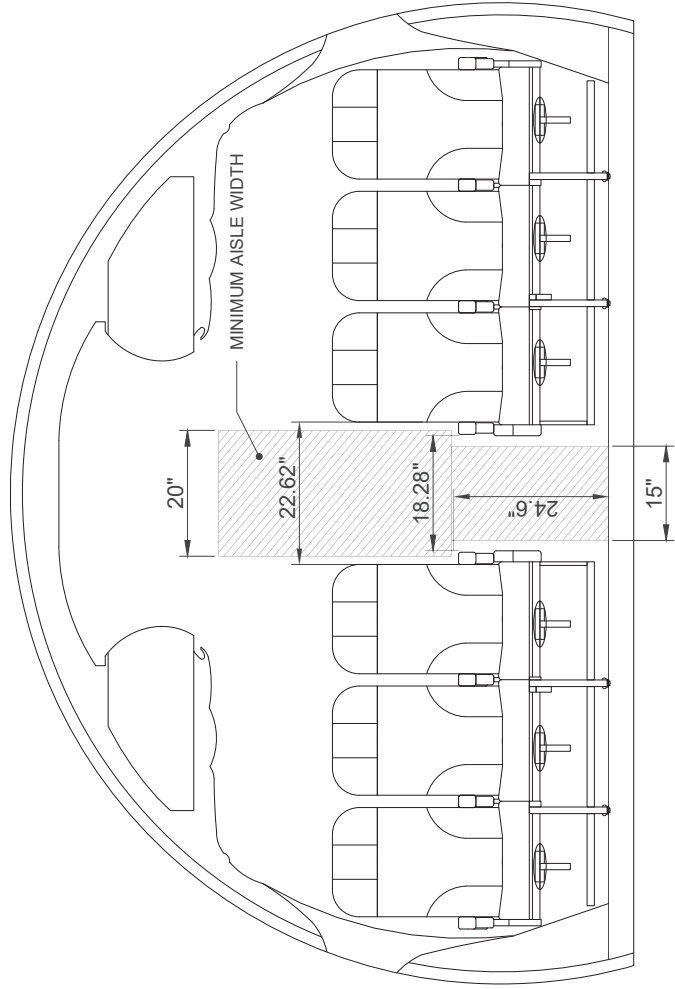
D5. CABIN NARROW SECTION FRONT VIEW (C64) - MINIMUM AISLE WIDTH REQUIREMENTS
